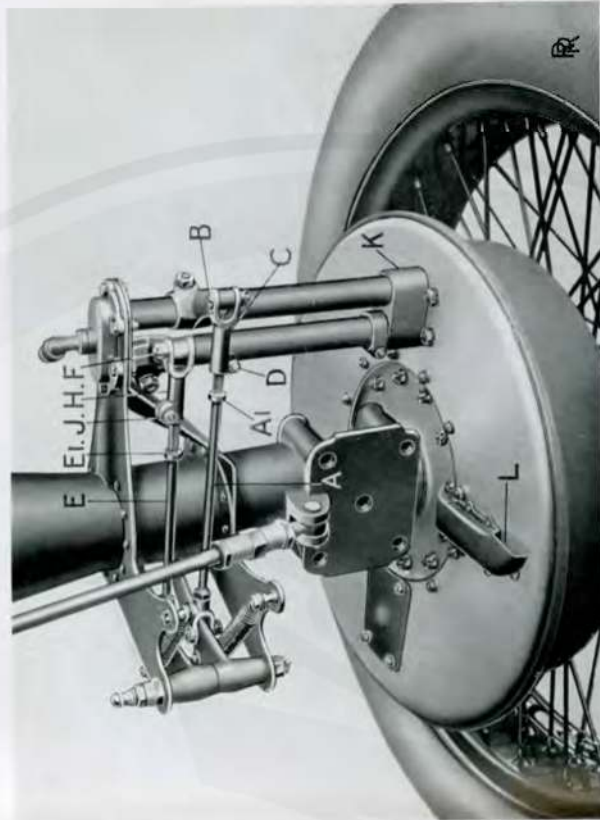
BRAKE ADJUSTMENT UNDER AXLE.
